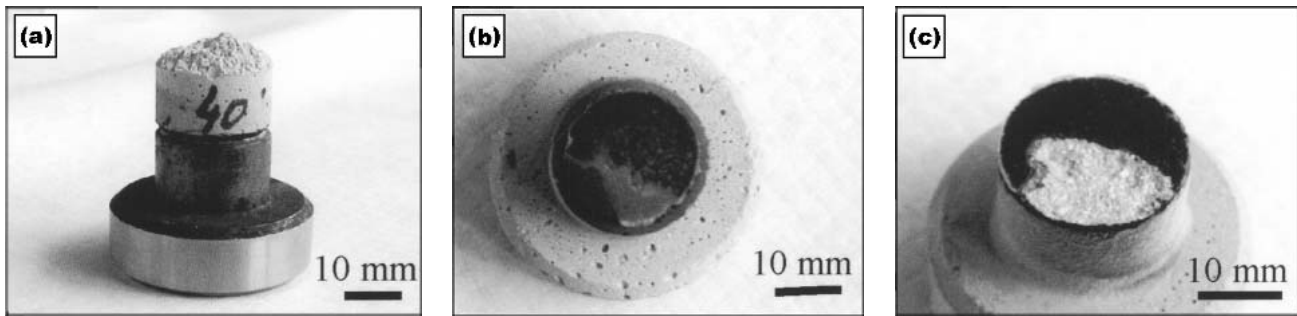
Test specimen fracture: (a) cohesive fracture of the substrate, (b) fracture at the glue level, and (c) mixed type
